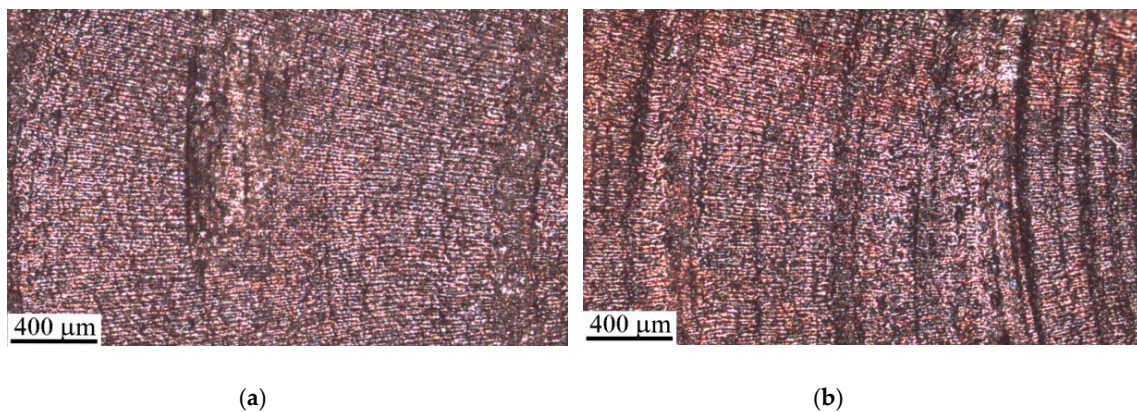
presents the appearance of GTAW and GTAW + EMS welds. It reveals that the patterns of ripples on the GTAW weld change periodically, but that those on the GTAW + EMS weld are uniform and narrower, relatively. The measurements show that the average width of a GTAW weld is 9.765 mm with a standard deviation of 0.327, and that the one for a GTAW + EMS weld is 8.027 mm with a standard deviation of 0.262.
